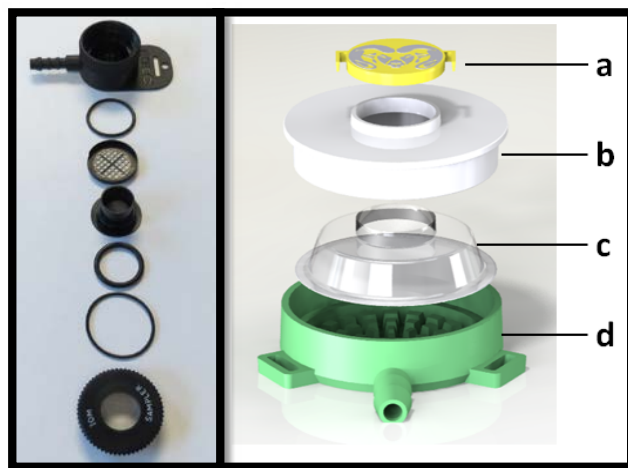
Left – Disassembled IOM Sampler. Right – Exploded view of the new sampling system (a) inlet cover, (b) inlet, (c) capsule and filter, and (d) housing.
